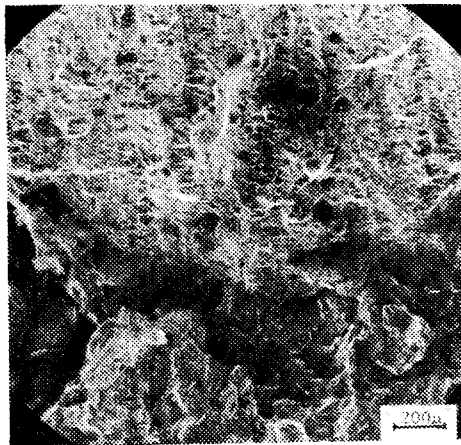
Fractographs welded specimen by wet electrode $\sigma=55kg/mm^2$
